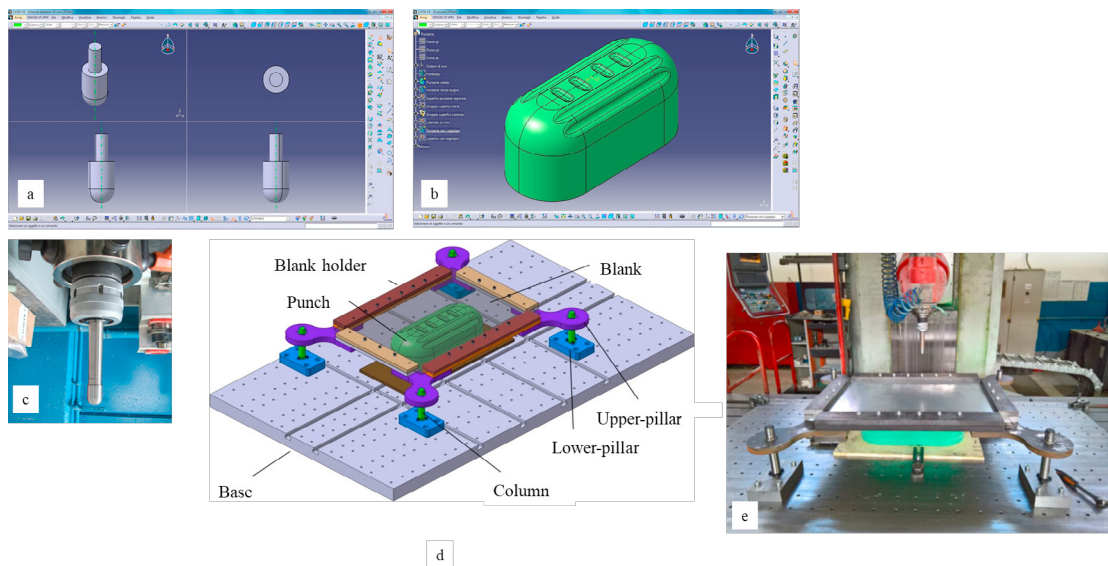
CAD design (a) of the punch and (b) of the epoxy full die matrix ($800 \times 980 \text{ mm}^2$, $h=100 \text{ mm}$); (c) the punch inserted in the milling machine; (d) the schematic representation of the full set-up; (e) photograph of the test-rig used.
